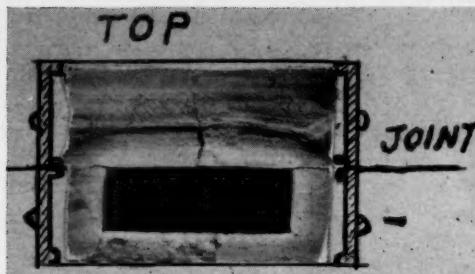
ACTUAL SECTION OF MOLD AFTER CASTING WAS REMOVED. THIS MOLD WAS ONE OF SERIES OF TABLE 7. LIGHT SECTION NEXT TO THE CASTING CAVITY SHOWS THE SILVERY PORTION OF SAND A OF FIG. 7.
